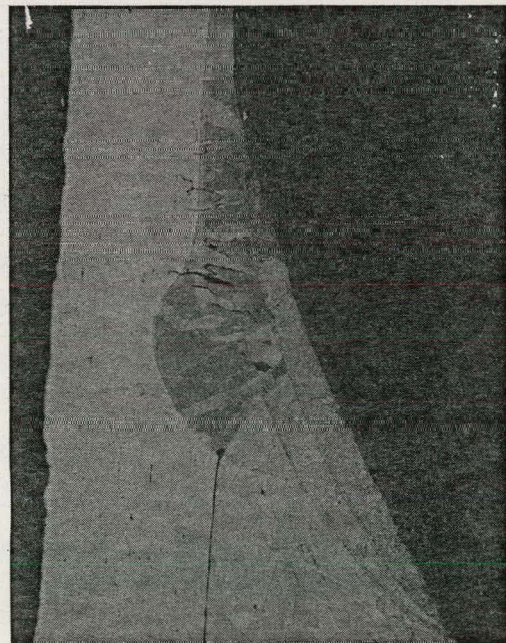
Weld crack - LOFT centerline stainless steel thermocouple.
